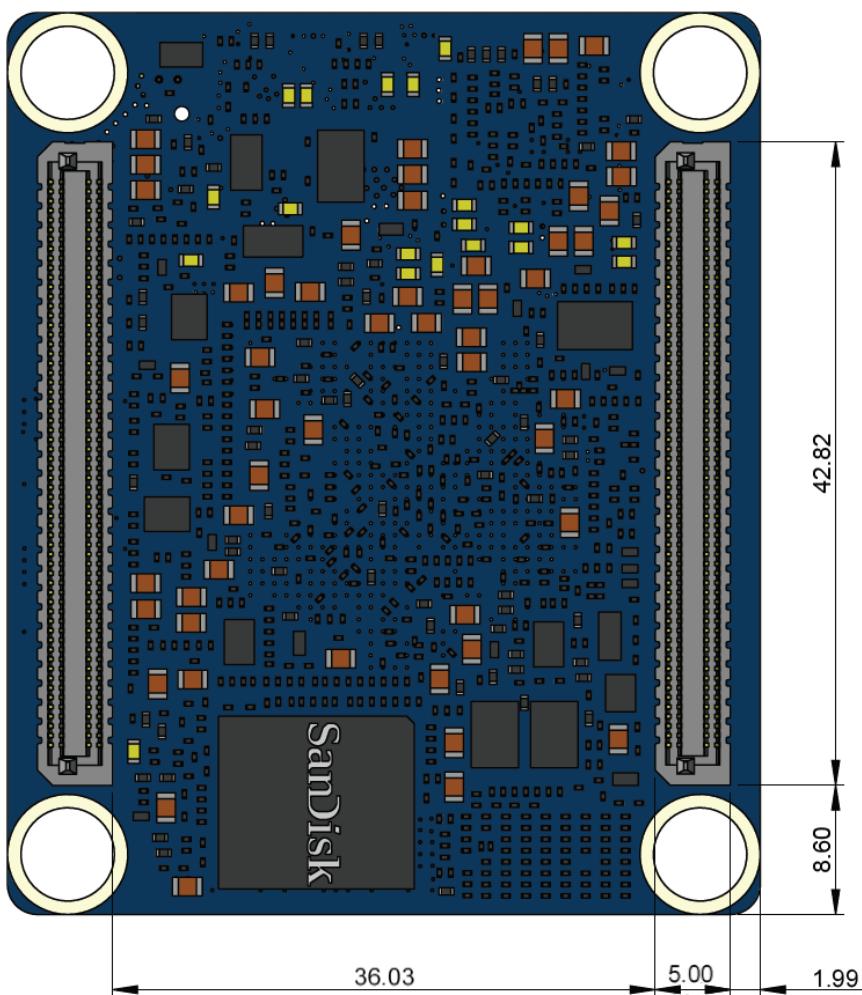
Mechanical dimension of Zynq UltraScale+ MPSoC SOM - Bottom View
